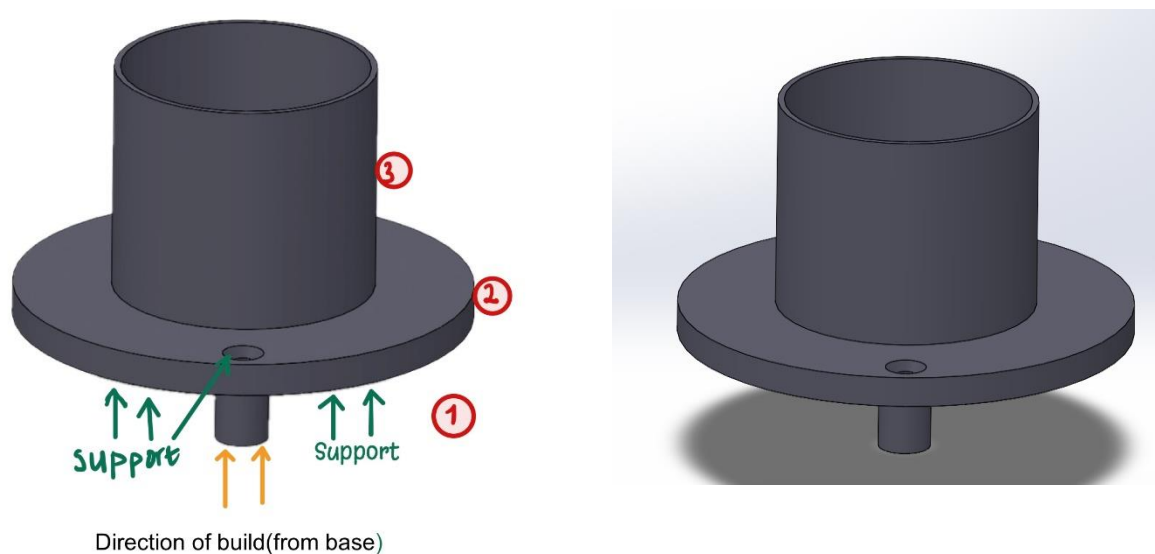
Input Adapter part with 3D printing layer details, support structure details and showing the isometric view of the part .
